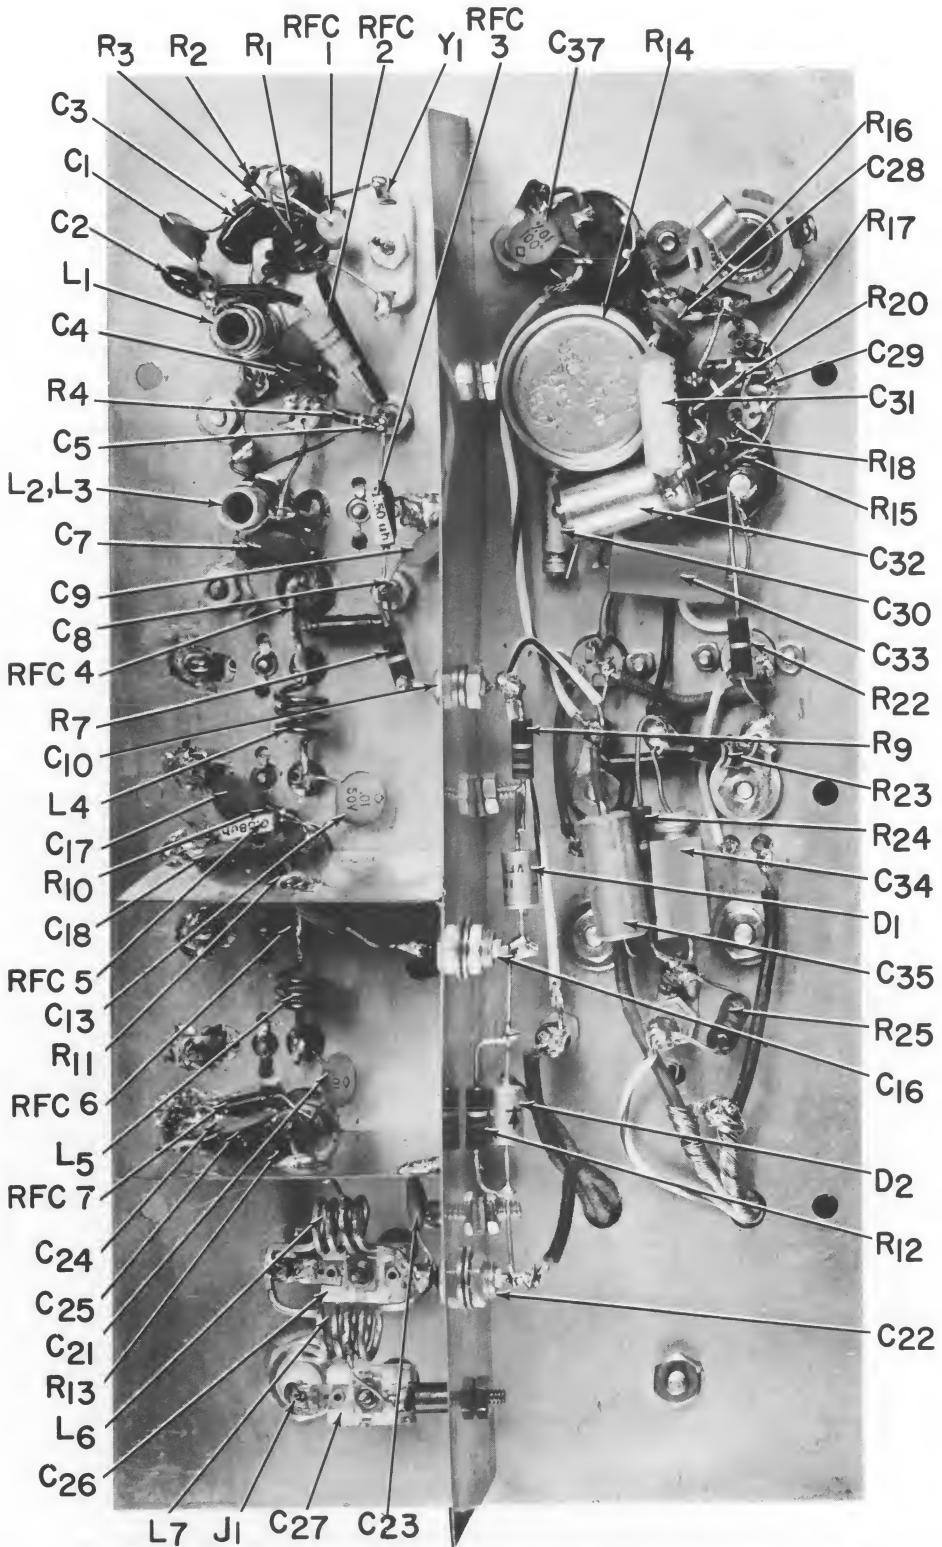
Bottom view of transmitter, showing RF section above and modulator section below.
